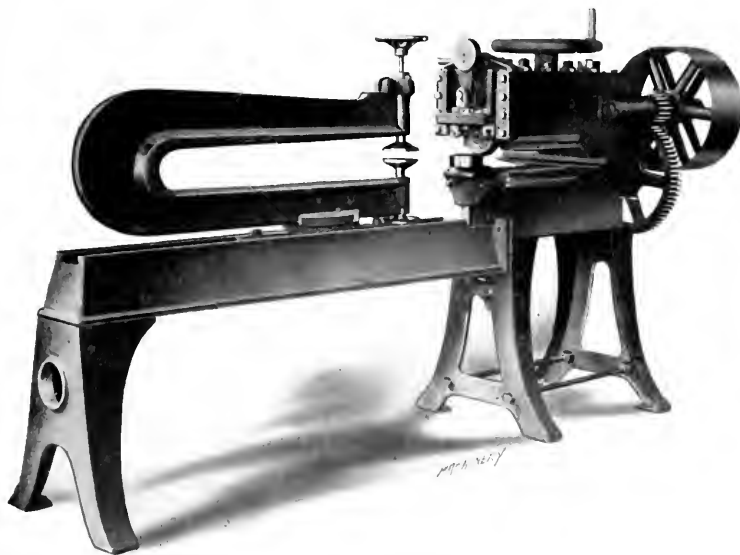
Niagara Machine for forming Flanged Tops and Bottoms for Barrels or Tanks
